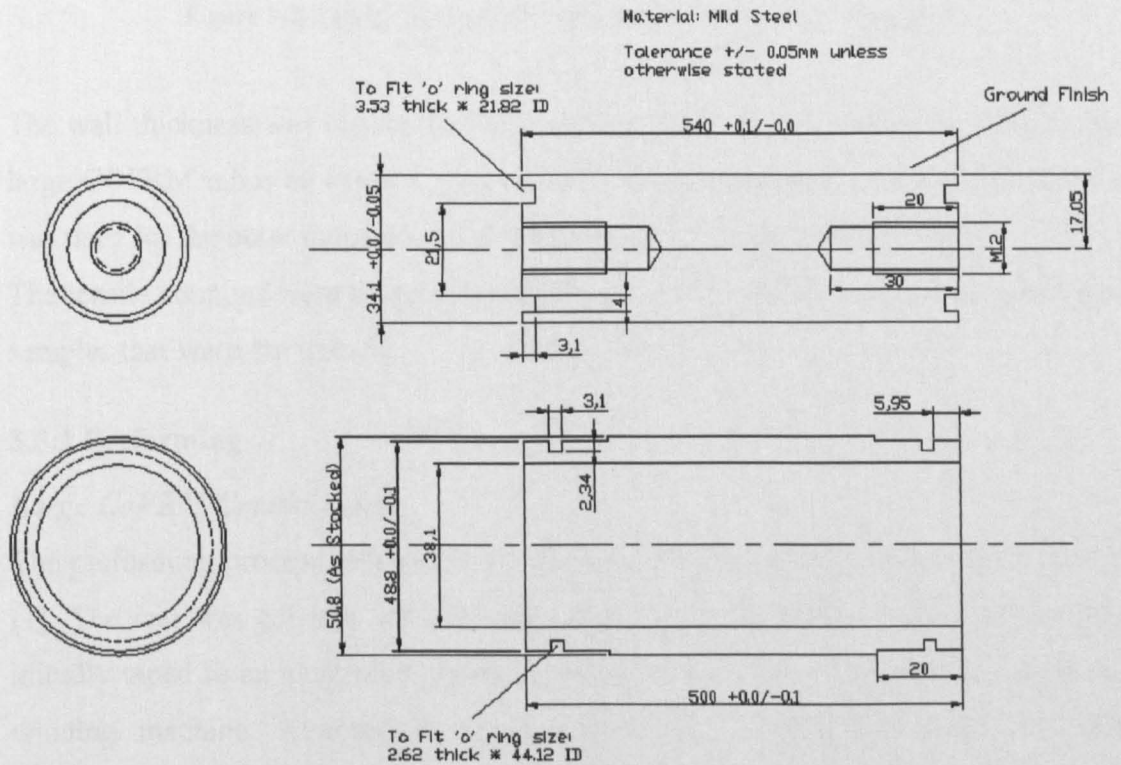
Inner and outer mandrel design for new tube mould (AutoCAD 2000)
